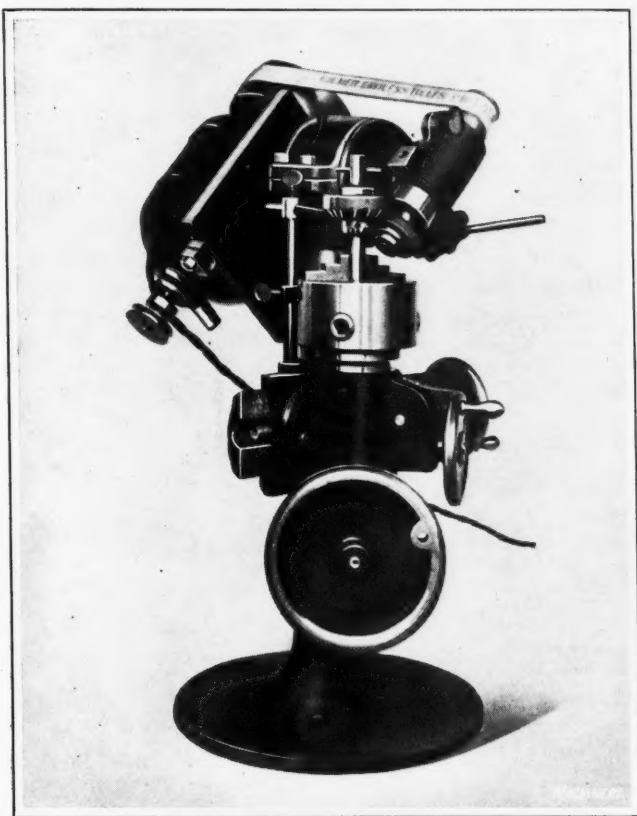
Grinding, Drilling and Turning Machine placed on the Market by the Ex-Cell-O Tool & Mfg. Co.
